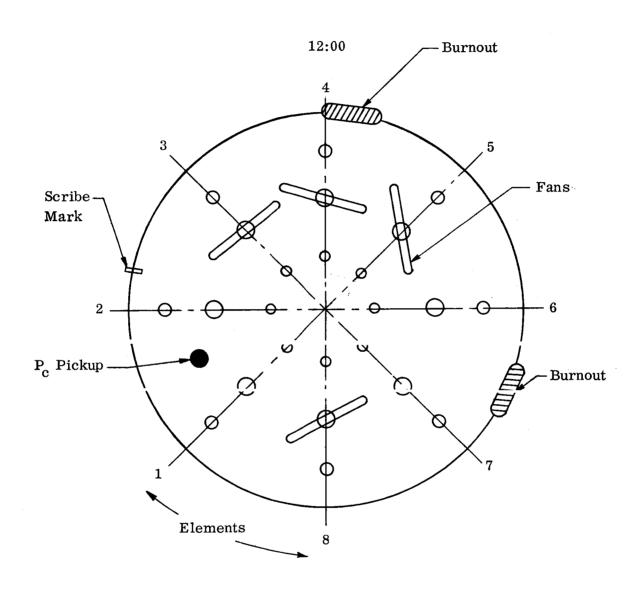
Injector S/N 1-A From Engine Assembly S/N 1 After Fire Test
